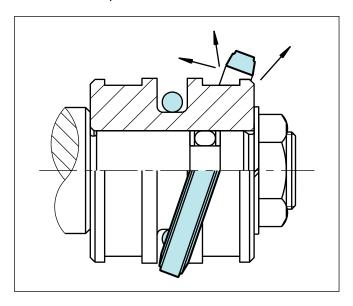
Fitting the seal ring onto the O-Ring in the groove
